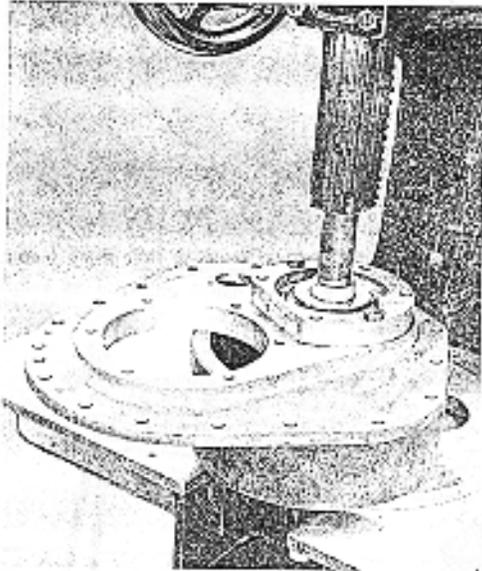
Extracting Pinion Shaft from Bearing Retainer using Press.
